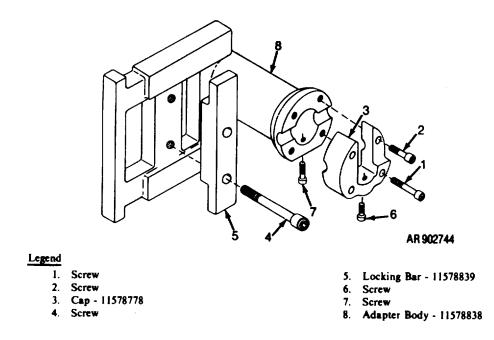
Disassembly/assembly of adapter assembly PN 11578865 for M101A1
